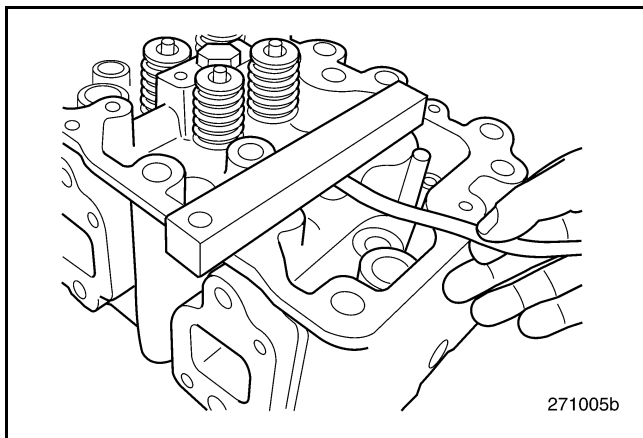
Checking Cylinder Head for Fretting Damage
